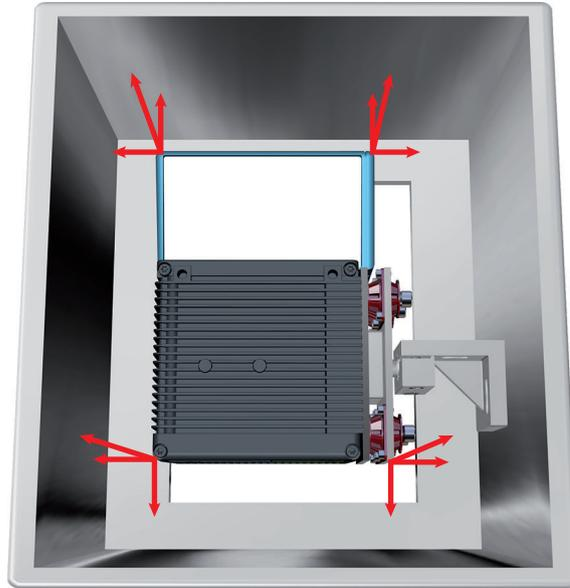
Mounting with mounting holder - taking the working distance into consideration
